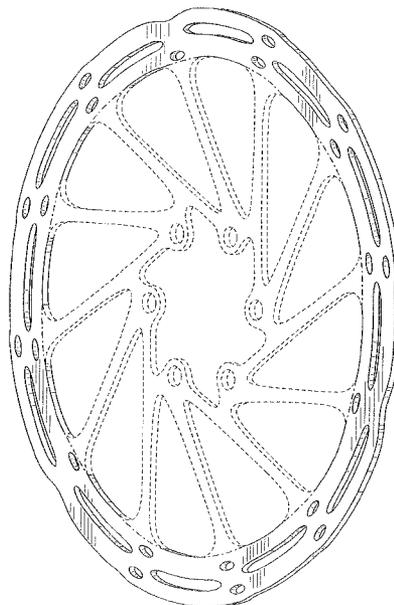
is a perspective view of a first embodiment of a disc brake rotor portion showing my new design;
